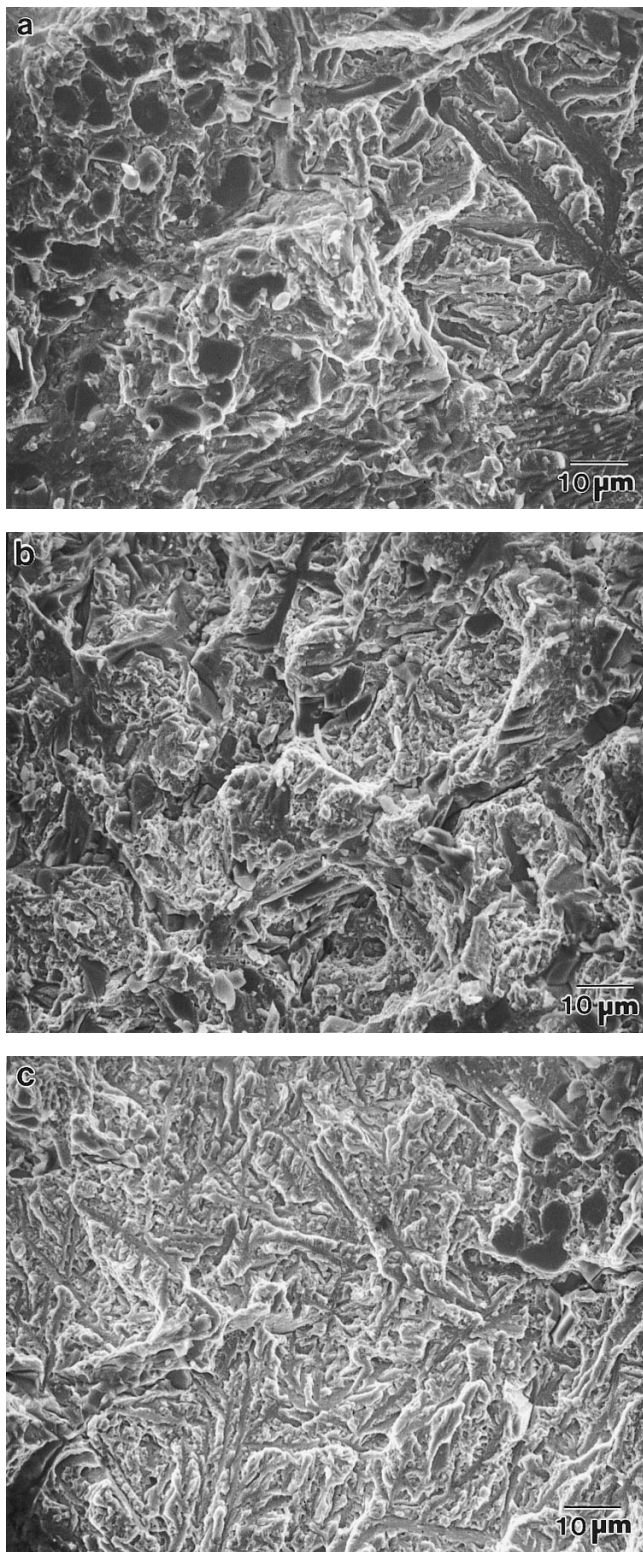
SEM fractographs of the *in situ* fracture specimens for (a) roll A, (b) roll B, and (c) roll C.
